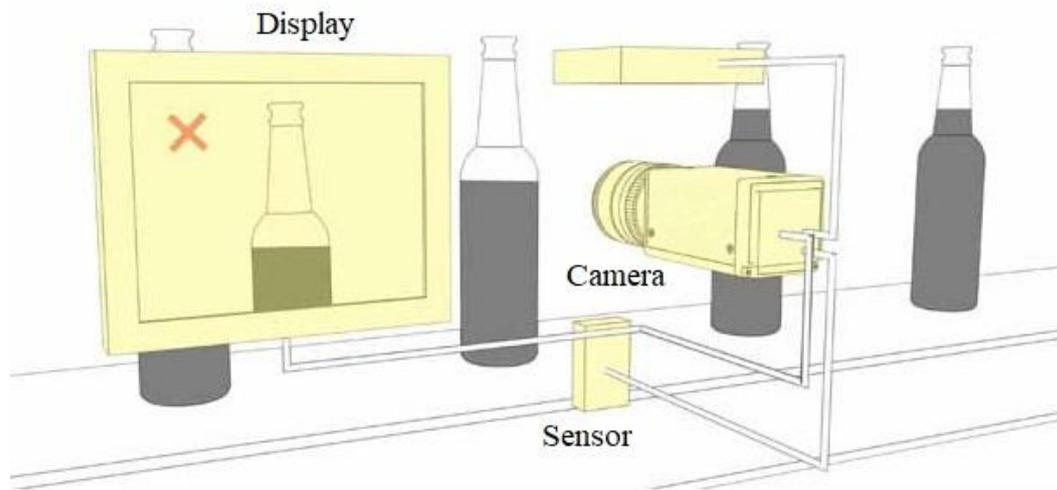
Optical control of the filling level of bottles flowing on a conveyor
